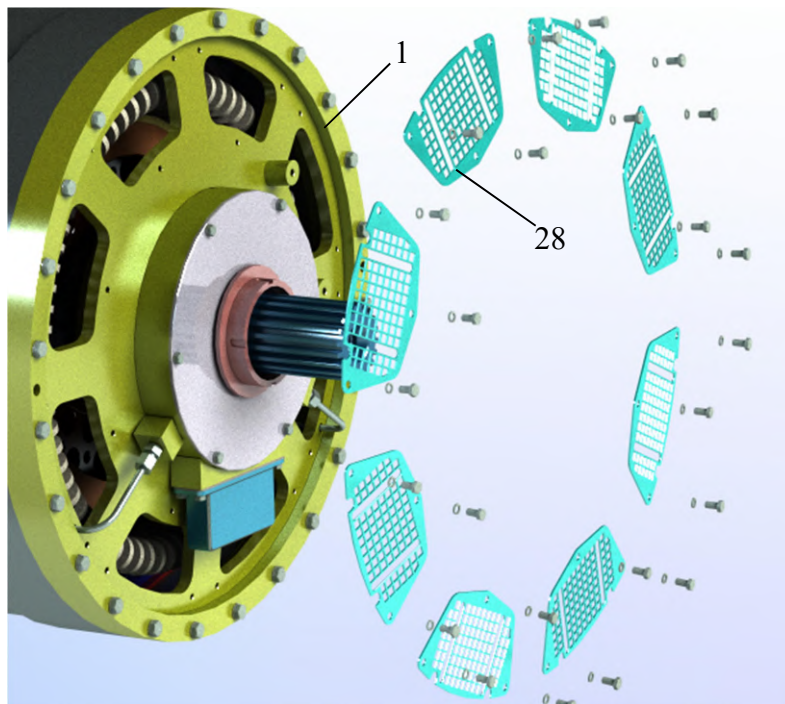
Installation of Ventilation Grilles of the Bearing Shield (Drive Side)
